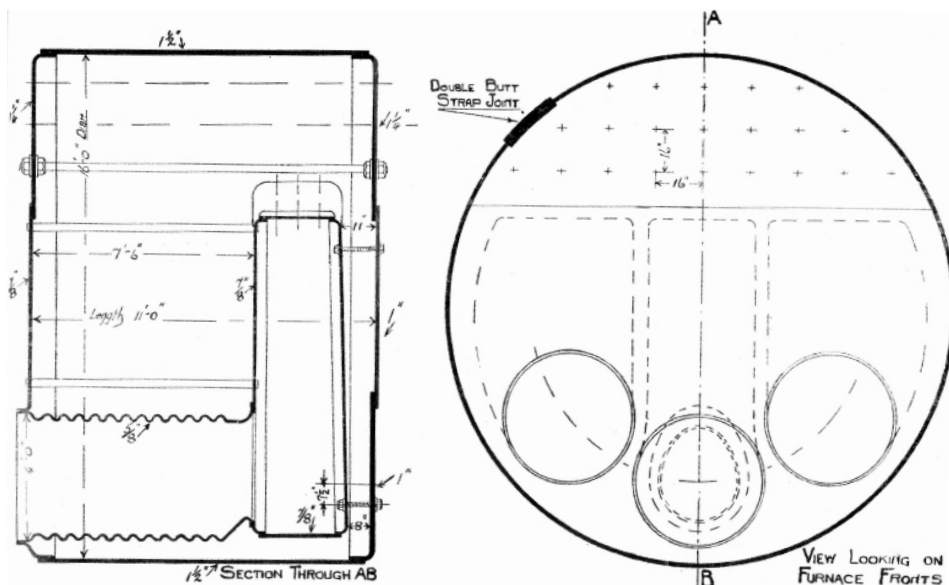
Single-Ended Multitubular Wet-Bottomed Cylindrical Boiler, commonly known as a Scotch Boiler.
